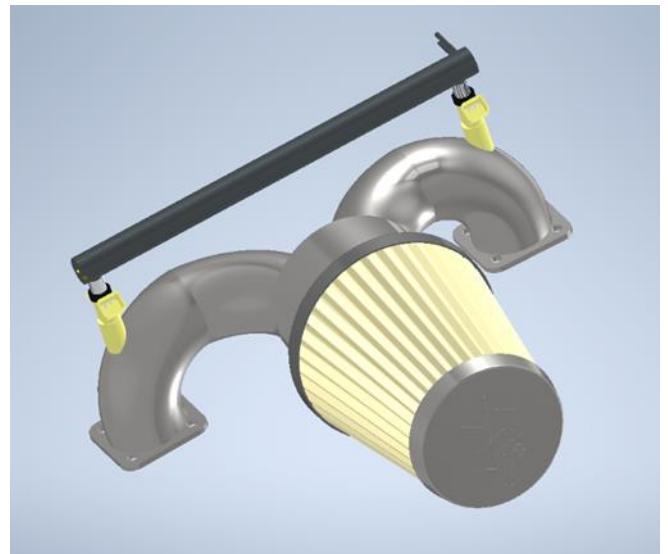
Design of the fuel ramp and injection nozzles in the intake manifold - front view [author]
